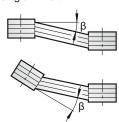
When Using a Chain, Sprocket or Gear Wheel
